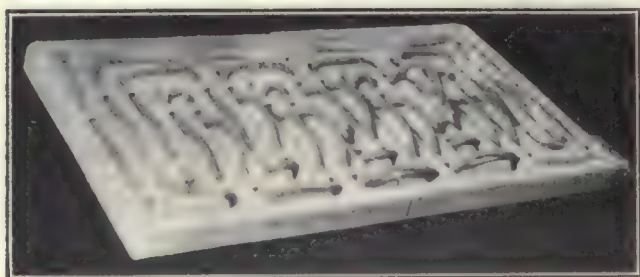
POORLY DESIGNED INVERTED HEATING ELEMENT
